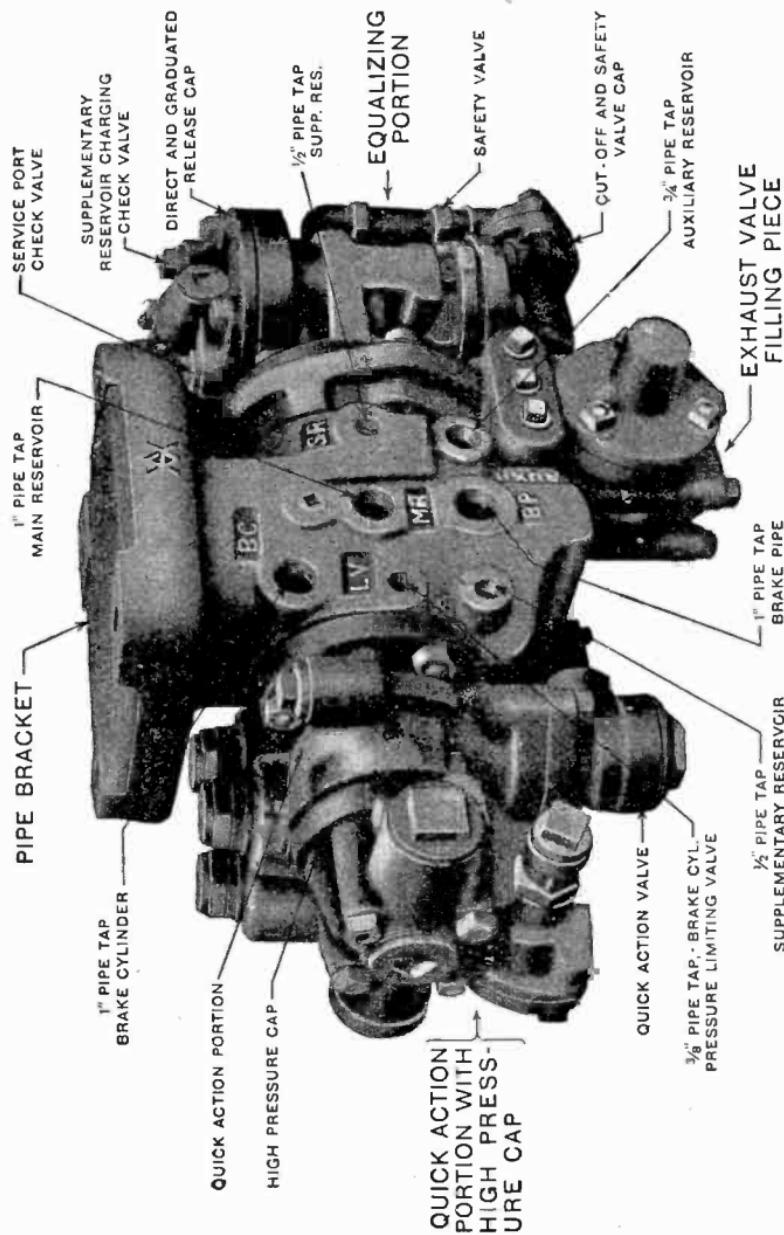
Westinghouse universal valve showing pipe bracket, equalizing portion, exhaust valve filling piece, quick action portion, etc.
